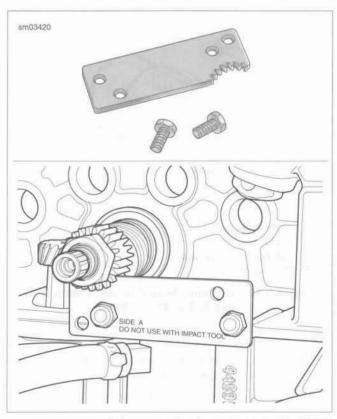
Crankshaft Locking Tool (Part No. HD-43984)
